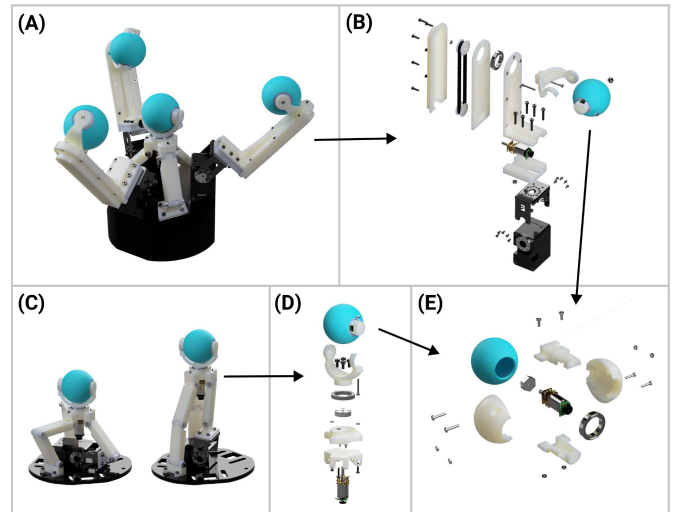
CAD renderings of the mechanical design of Roller Grasper V3. (A) Fully assembled hand. (B) Exploded view showing the pivot and base joints assembly for the three fingers with revolute base joint. (C) Parallel mechanism used to achieve the prismatic joint at the center of the hand (Lowest position shown at left and highest position shown at right). (D) Exploded view of the pivot joint attached on top of the parallel mechanism. (E) Exploded view of the roller assembly that is used on all four fingers.
